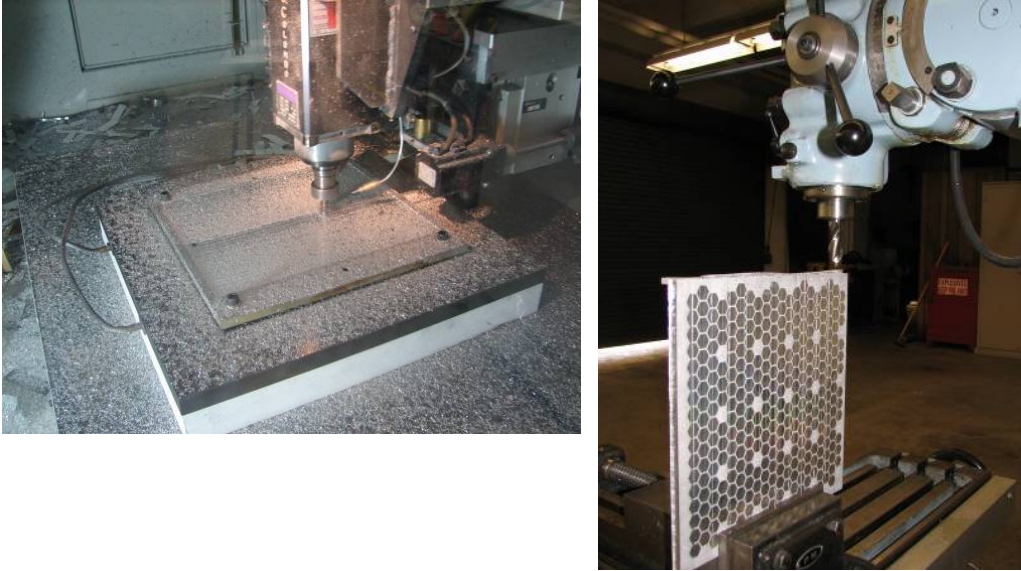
a) CNC mill removing excess material from baseplate, b) Final operation to remove segment of baseplate.
